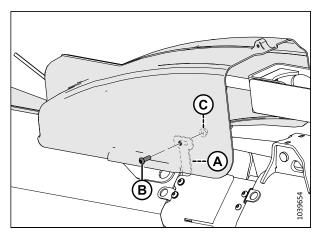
Right Outboard Linkage Cover – View from Front of Header
